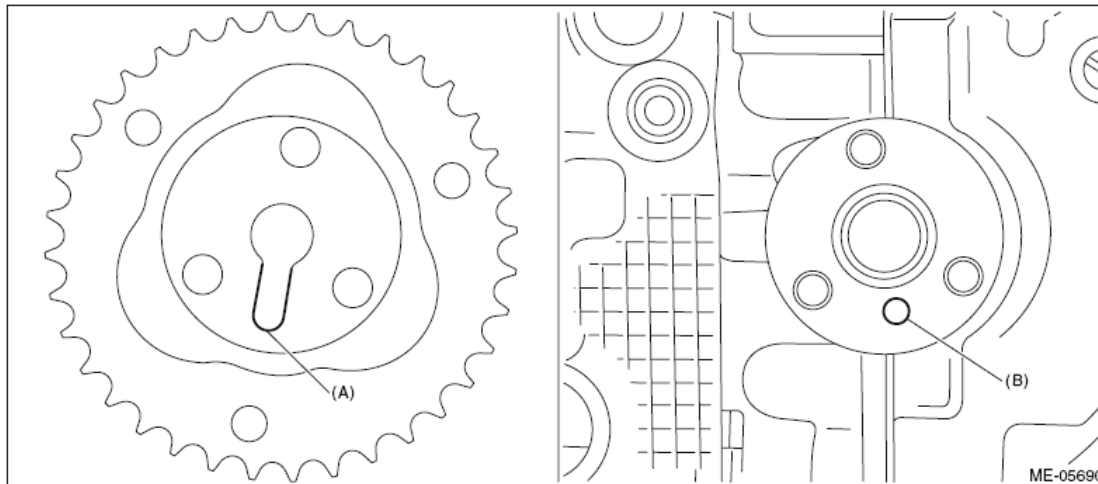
Identifying Knock Hole Of Exhaust Cam Sprocket And Knock Pin Of Exhaust Camshaft
